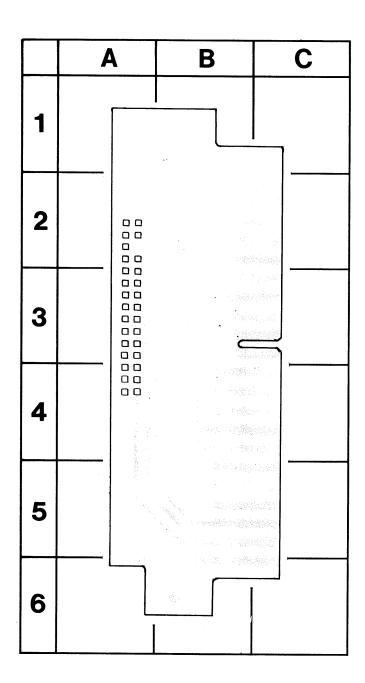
HORIZONTAL FINGER PCB ASSEMBLY
